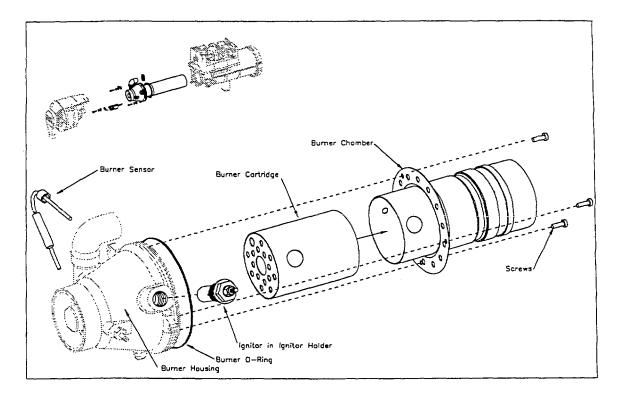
Burner Cartridge, Chamber, Wick, Igniter and Igniter Holder - aligned
